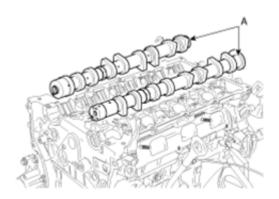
Identifying Camshafts Courtesy of KIA MOTORS AMERICA, INC.
